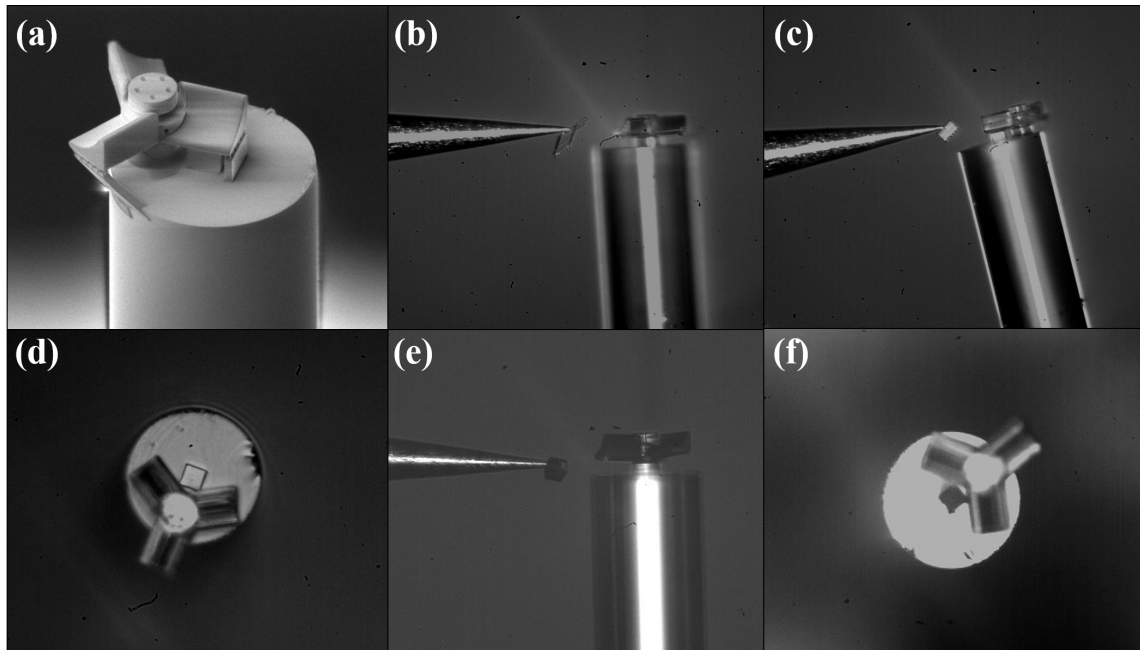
Flow sensor assembly process. (a) SEM image of the as-fabricated device. (b) An angled support being removed with a probe. (c) The vertical support being removed by a probe. (d) Top view of the device after sputtering. (e) Masking cap being removed by a probe. (f) Top view of the device after the masking cap has been removed, showing the core not coated with gold.
